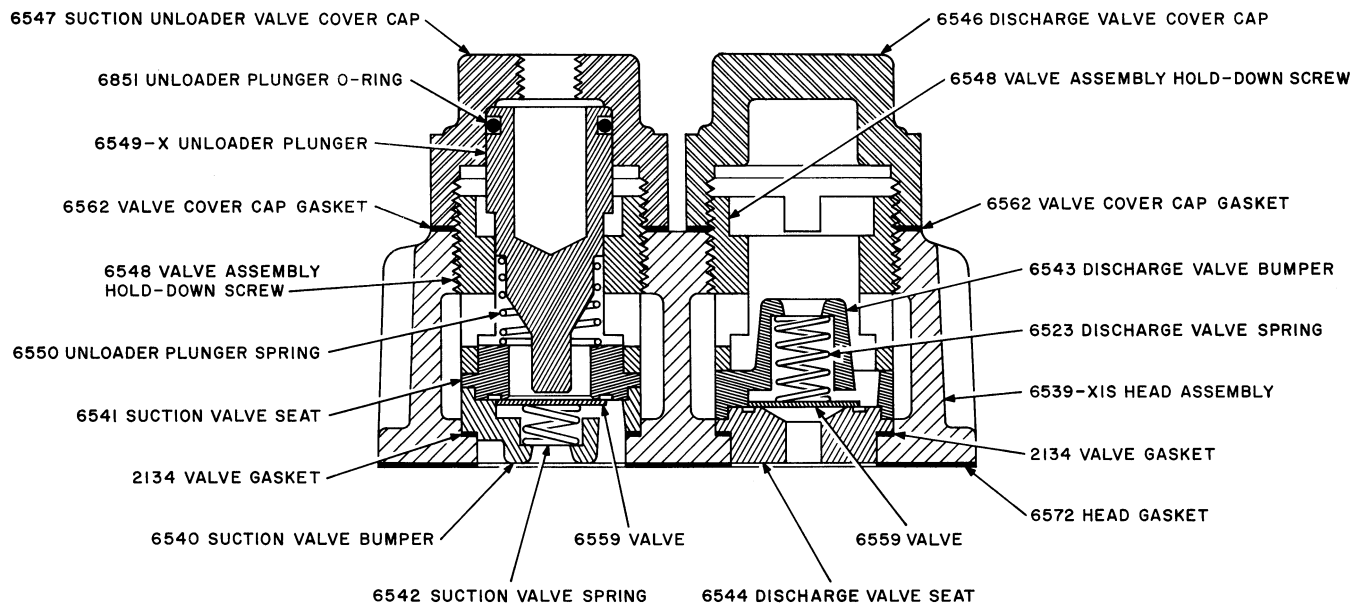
KS-16432 L2 Air Dryer—Air Compressor Head Assembly (Suction Unloader and Discharge Valves)
